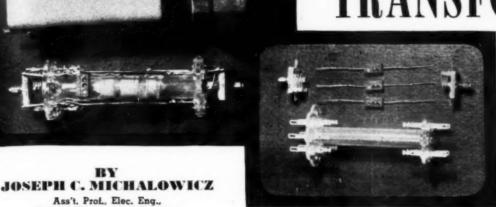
Parts required to construct discriminator transformer. Photograph shows the fixed and tuning condensers, coil form, shield can, and the completed assembly.
